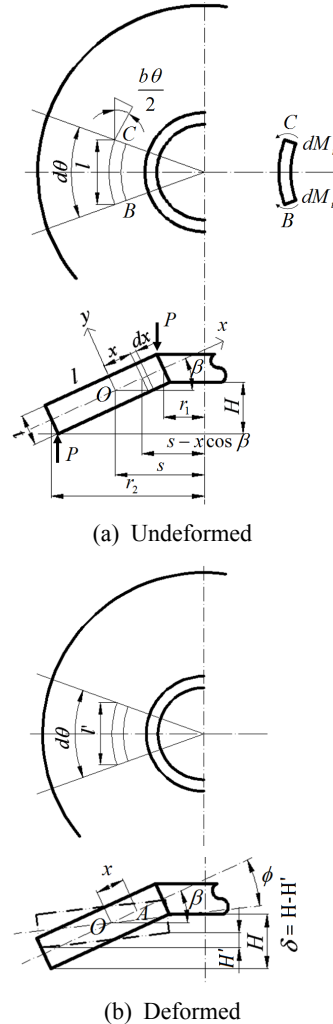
Before and after deformation of the cross-sectional shape of the disc spring
